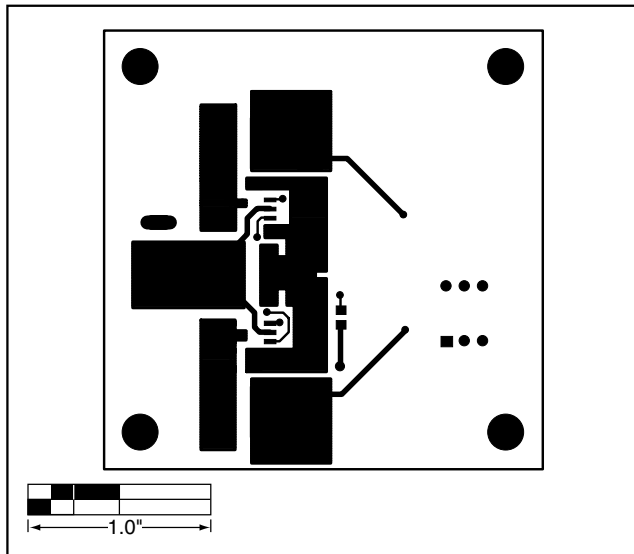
MAX1761 EV Kit PC Board Layout—Component Side
